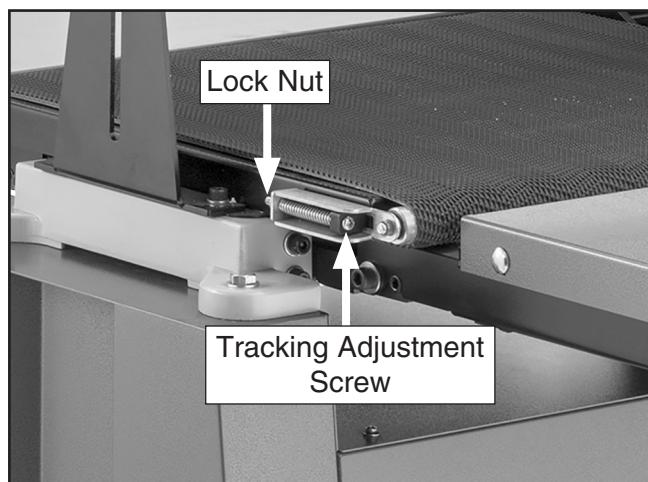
Conveyor belt tracking adjustment screw and lock nut.
